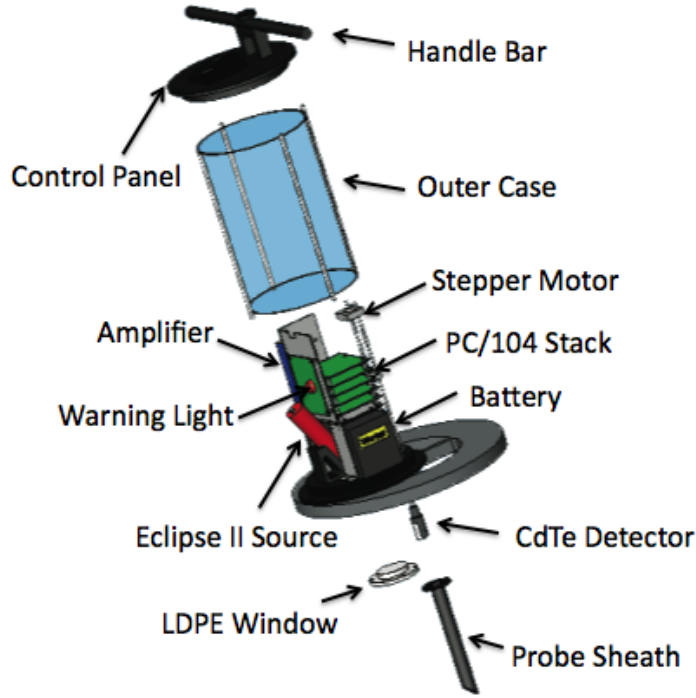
Exploded view highlighting all the major components of the XRAM device.
